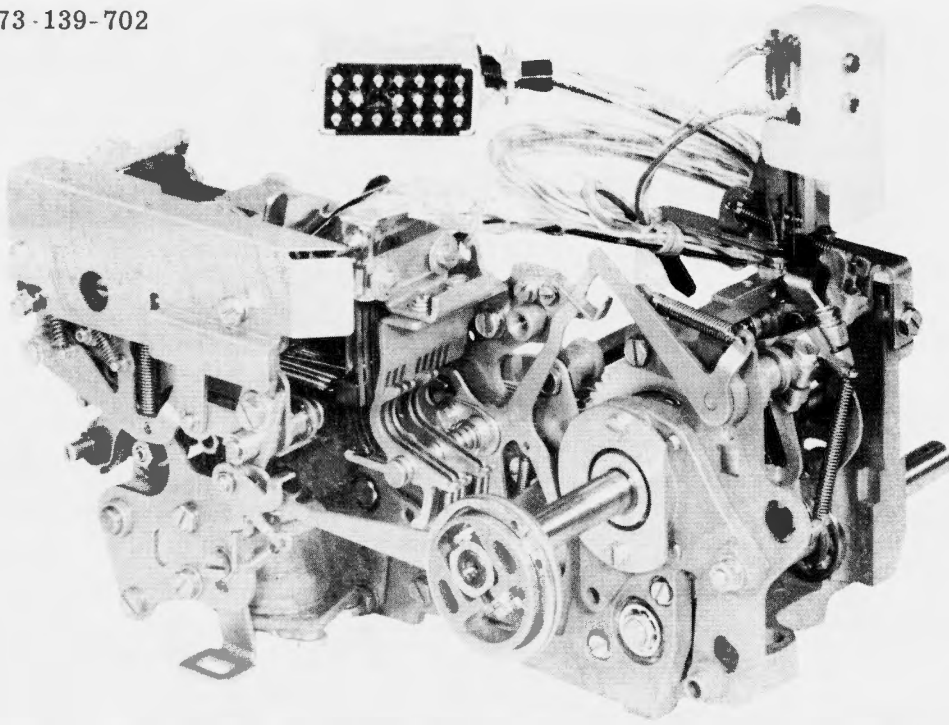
28 Non-Typing Perforator - Chadless Tape (With Code Reading Contacts, Timing Contacts and Backspace Mechanism)
